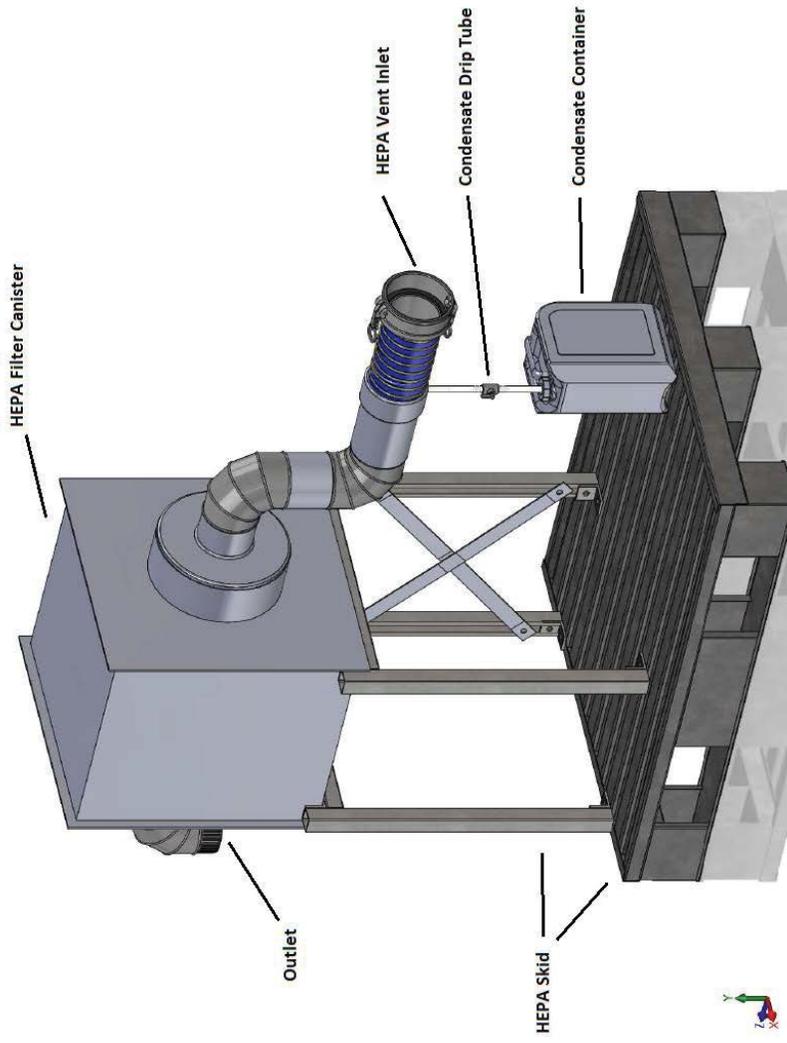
Passive Ventilation Filter Assembly for Tunnel Number 1
